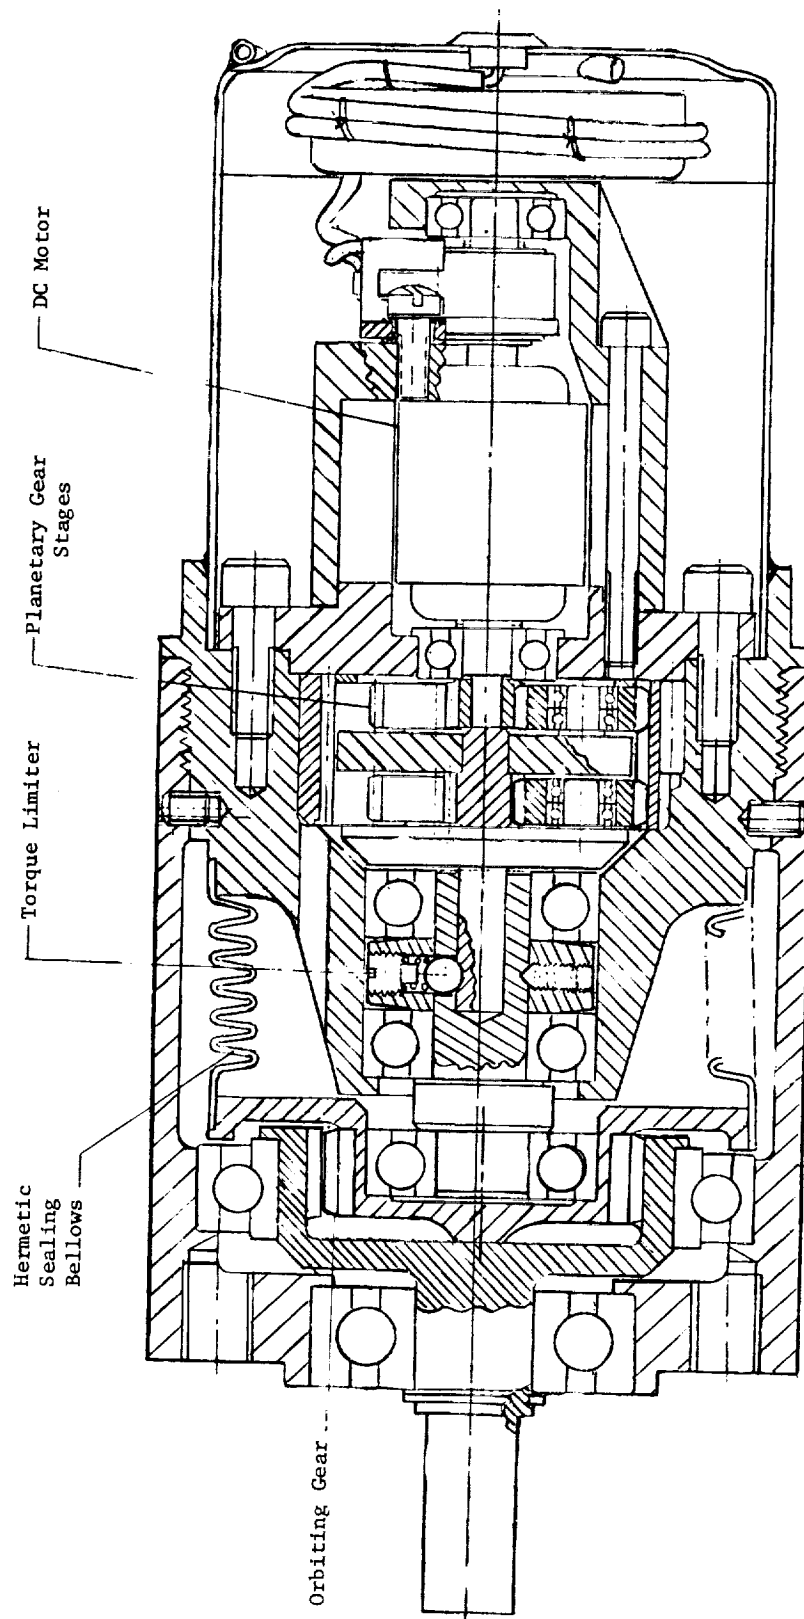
Hermetically Sealed (DC) Motor Using Planocentric Output Stage with Orbiting Gear
